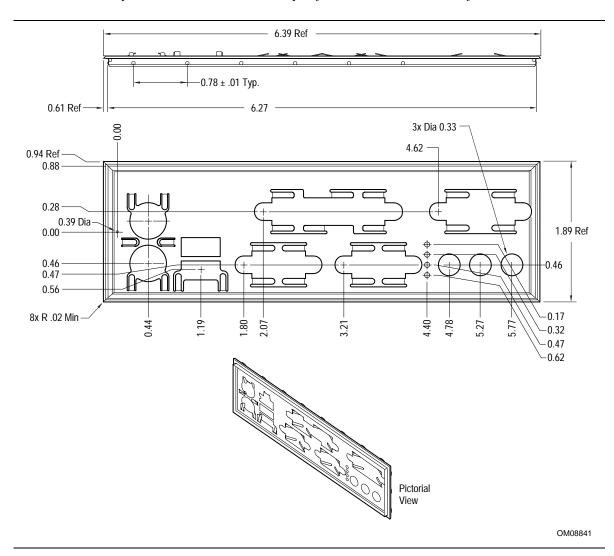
I/O Shield Dimensions (for CC820 Boards with Audio Connectors)
